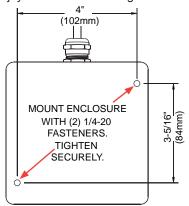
Joystick Operator Station Hole Dimensions
